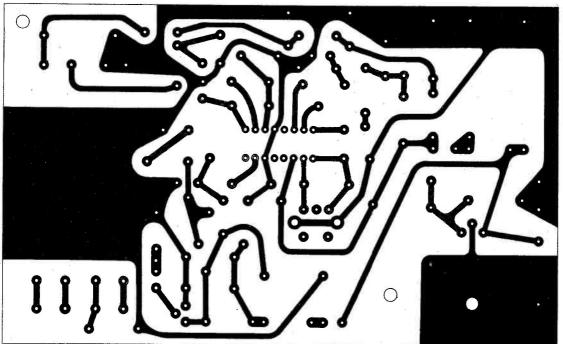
Component location and printed circuit layout for the main Tuner and IF board. Both drawings are actual size.
